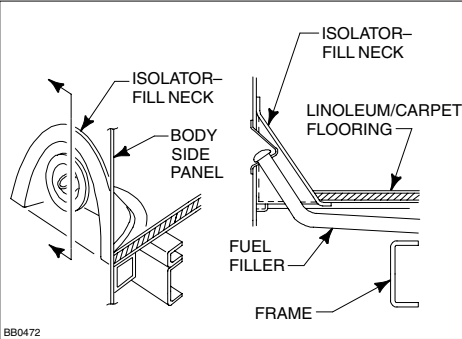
FIGURE A – BODY MOUNTED FUEL FILLER OPENINGS
